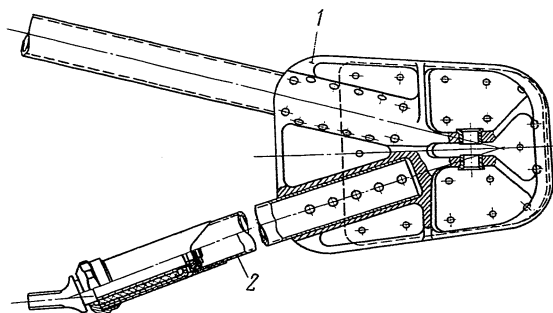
BRACE STRUT-TO-BEARING PLATE ATTACHMENT
